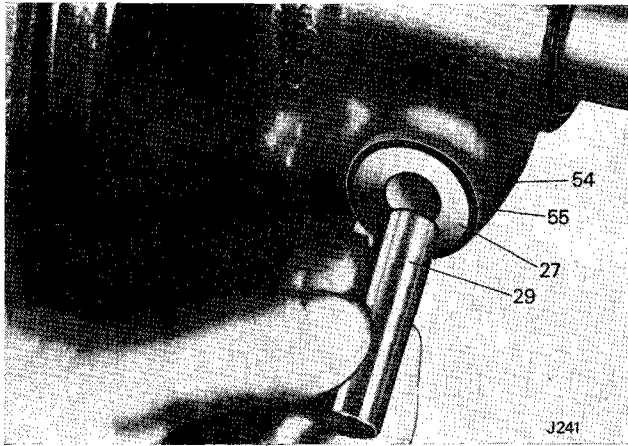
Removing steel bush from nylon bushes in trunnion housing
